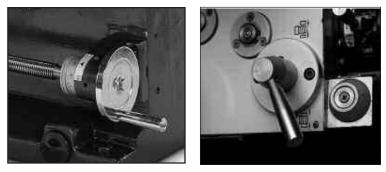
Longitudinal Fine Feed Handwheel (Left) & Half-Nut Engaged (Right)
